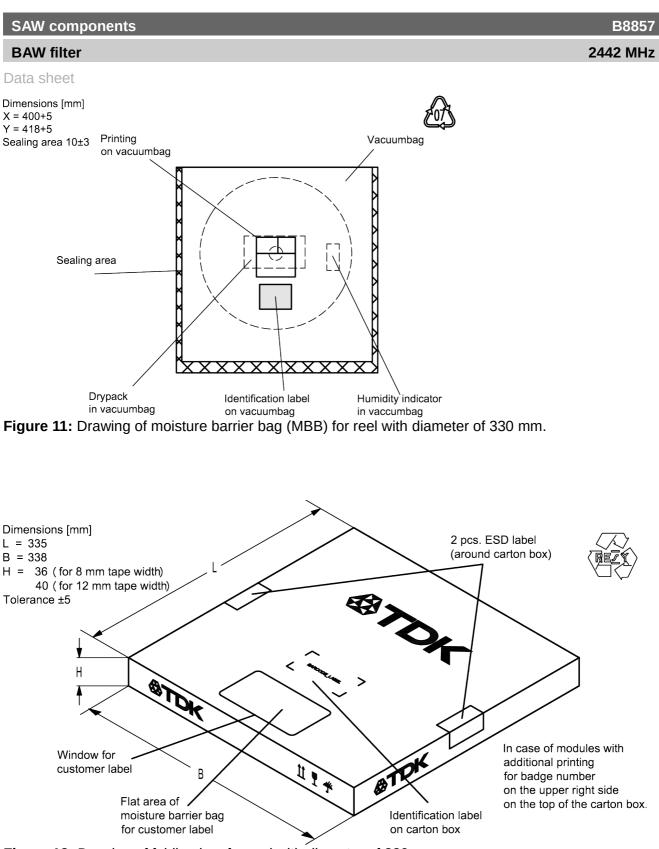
Drawing of folding box for reel with diameter of 330 mm.
